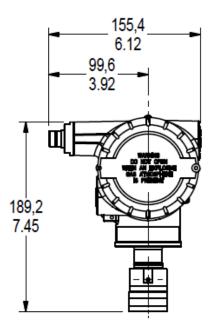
In-Line Gauge, typical mounting dimensions for STGW73L, STGW74L, STGW77L, STGW78L, STGW79L (remote antenna adaptor shown, rear view)
